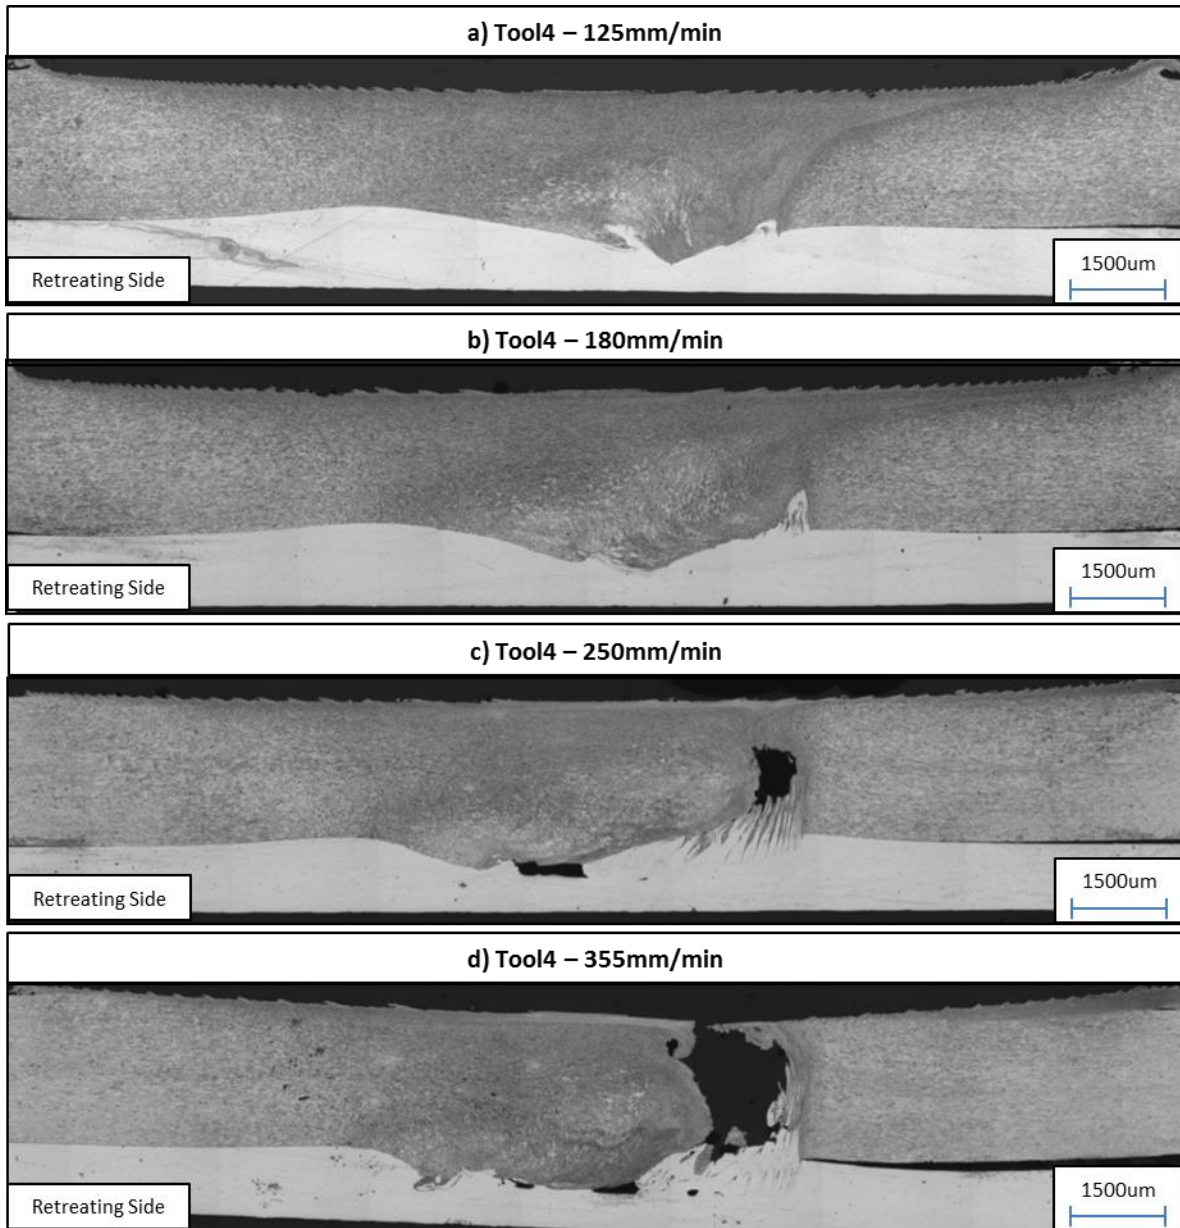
Optical micrograph images of a dissimilar AA7075/AA6022 FSW made at the following conditions: (a)Tool4-125mm/min (b)Tool4-180mm/min (c)Tool4-250mm/min (d)Tool4-355/min
